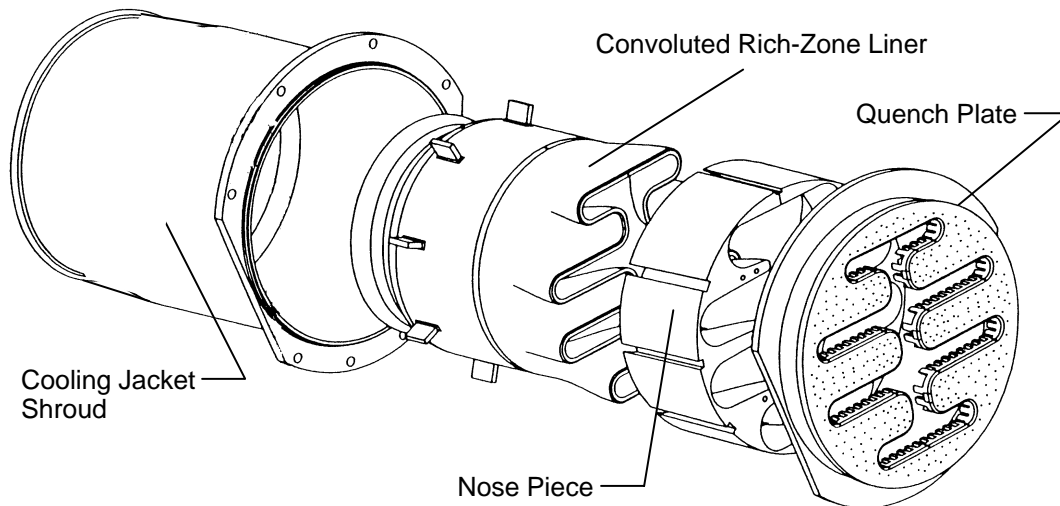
Rich-Quench Module Assembly (Bulkhead Subassembly Not Shown)
